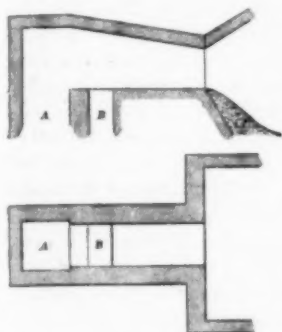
PART OF O. H. FURNACE USING PRODUCER GAS
